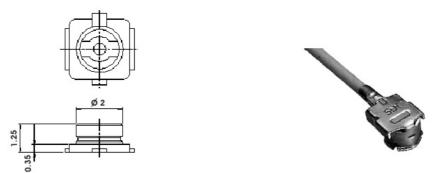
Mechanical dimensions of U.FL-R-SMT connector with U.FL-LP-040 plug
